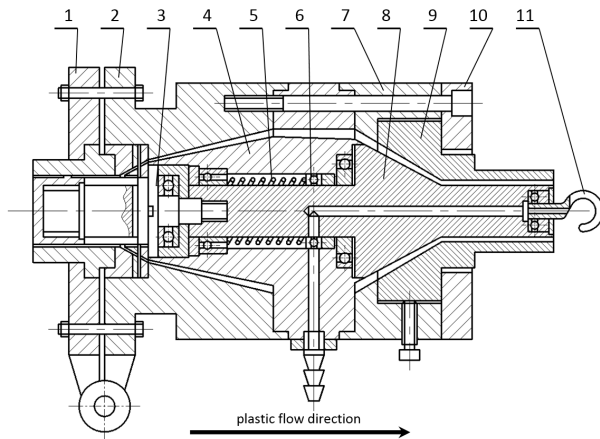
Extrusion head for pipes manufacturing (longitudinal section): 1 – ring, 2 – housing, 3 – clutch 4 – conical core, 5 – spring, 6 – air-distribution ring, 7 – the nozzle body, 8 – conical rotating core, 9 – Part nozzle, 10 – collar, 11 – hook to attach a rope with stopper
